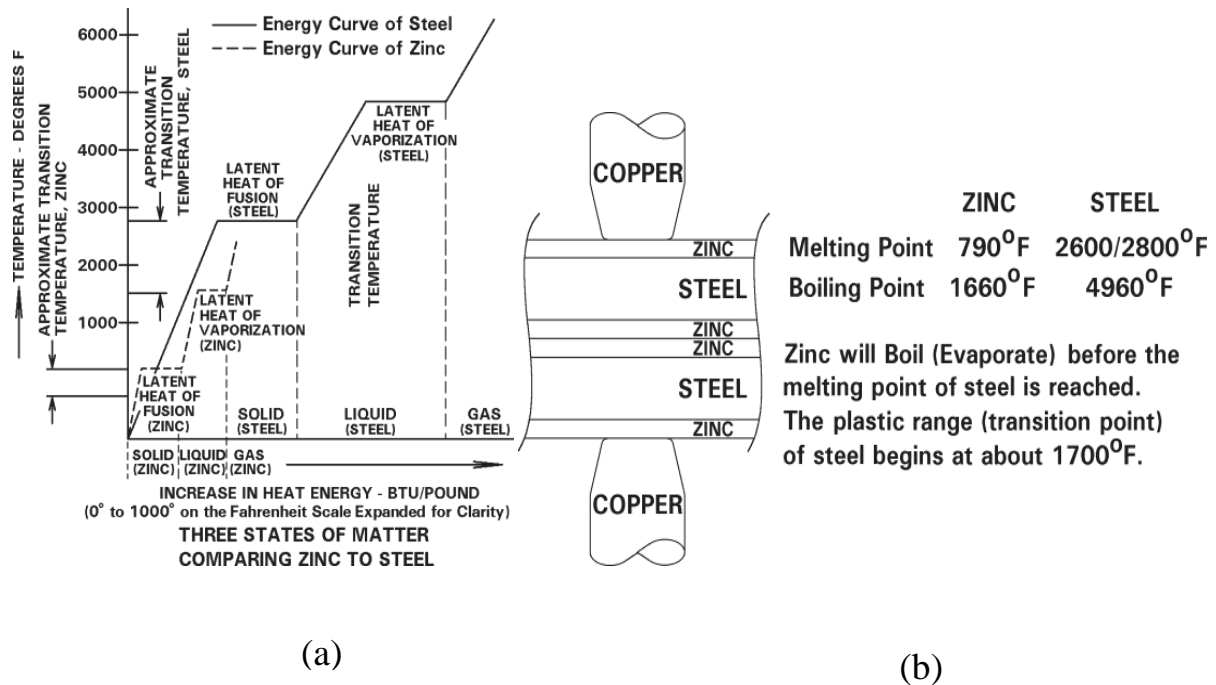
(a) State of matter comparing zinc & steel, (b) Exaggerated drawing of Zinc Layers (www. Resistanceweldsupplies.com, 2016)
